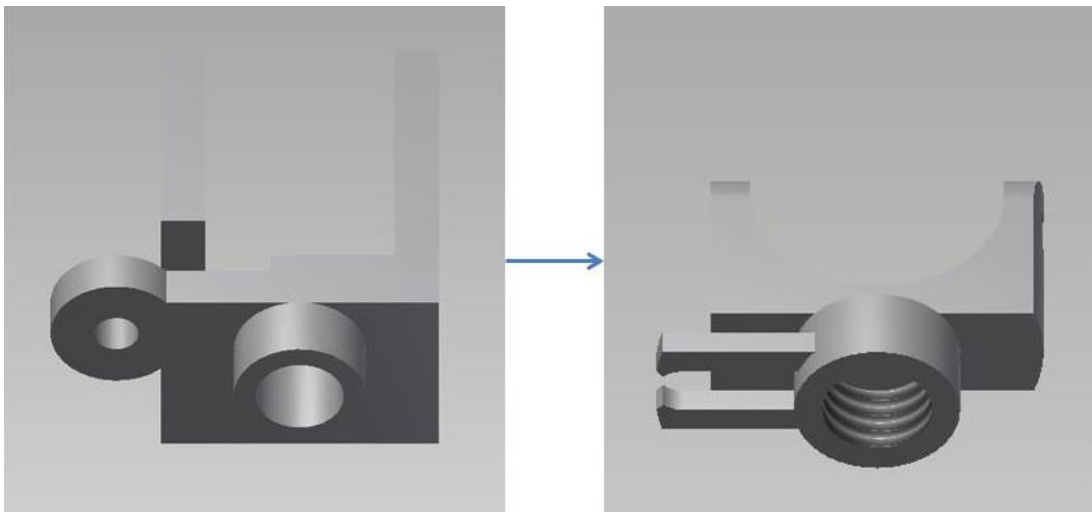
The screw system is adopted in the Mk2 design. The above images demonstrate that part 4 will be secured to the front unit frame using screws in the Mk2 design (right), in contrast to simple rivets in Mk1 (left).
